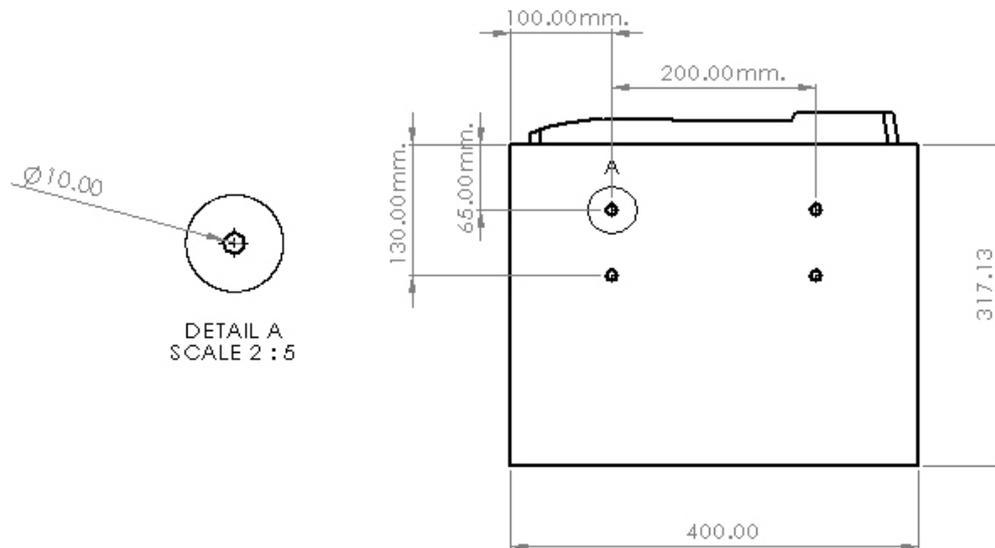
Dimensions of Drill 8 holes in the left-right molds (Improve)
